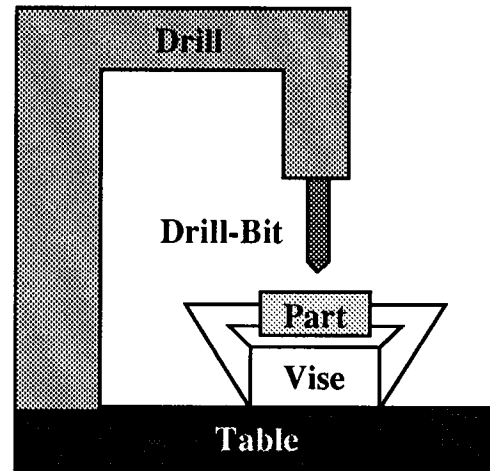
An Example of Set Up in the Machining Domain (from [Joseph, 1992]). In this example the holding device is a vise, the machine a drilling machine, and the tool a drill-bit.
